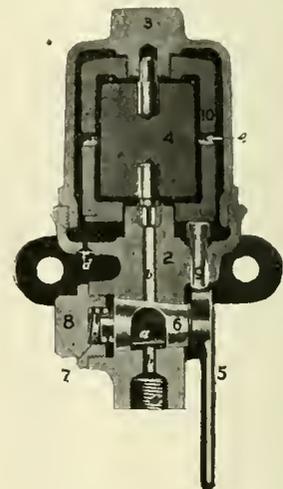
HIGH AND LOW PRESSURE RETAINING VALVE.
